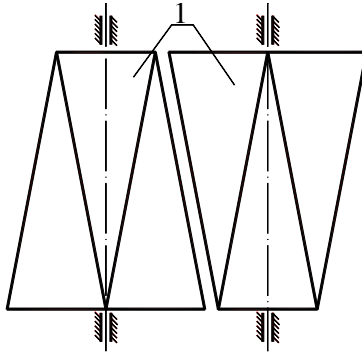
Rolling processing unit with conical surface of rolls: 1 – cone shaped rolls [23]
